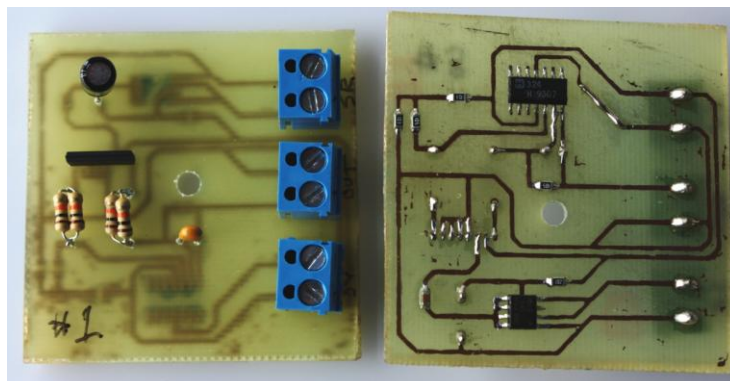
Sample PCB including magnetic sensor and support circuitry
